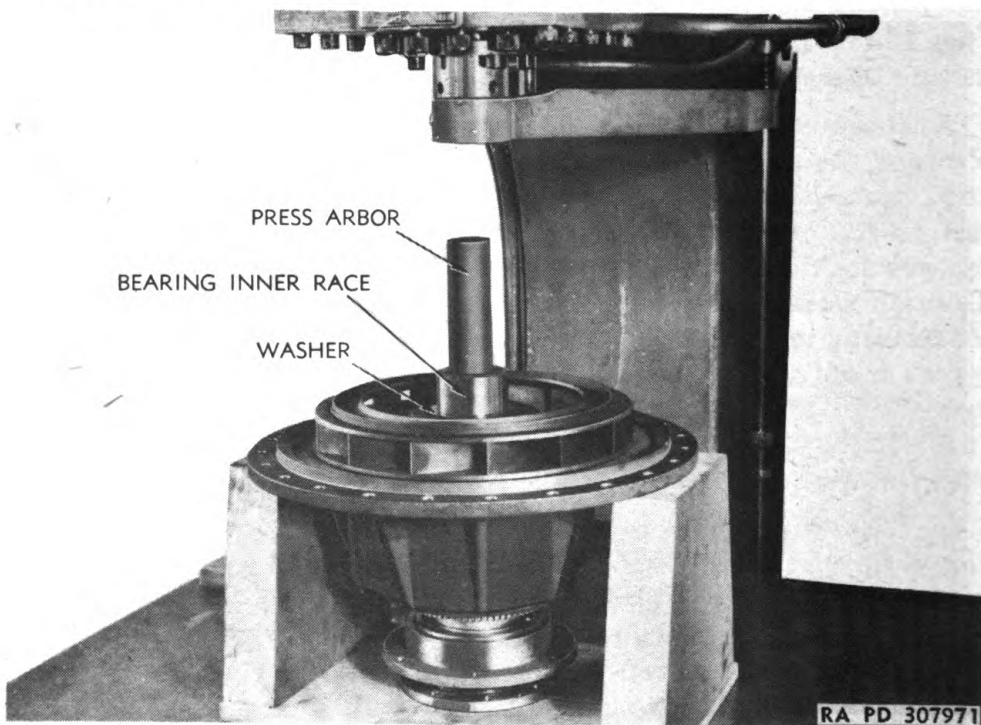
Pressing Input Shaft From Housing Cover Plate
